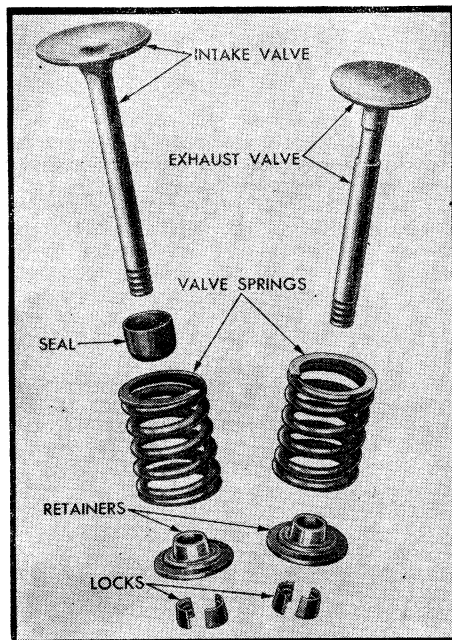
Layout of valves and related parts. Single rocker arm V8 engines
